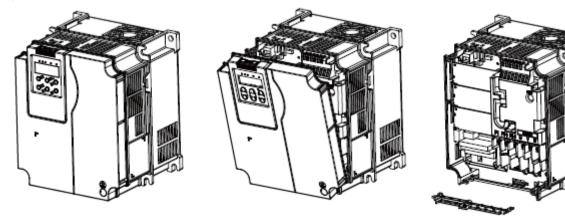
Removal of surface cover and cable lead-in plate (case of S5100-4T5.5G ~ 22G)
